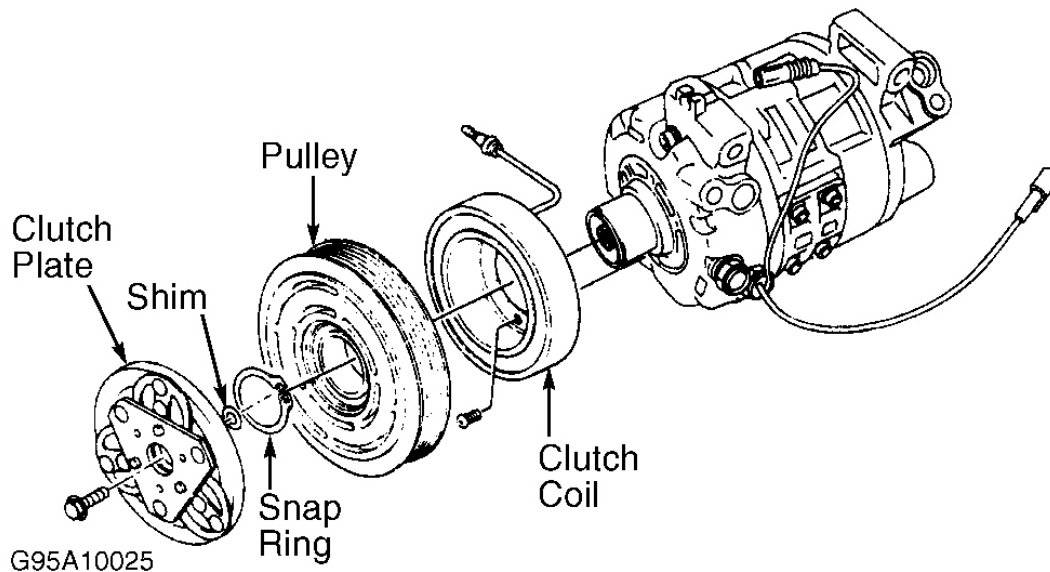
Exploded View Of Compressor (Zexel DKV-14D Rotary Vane)
